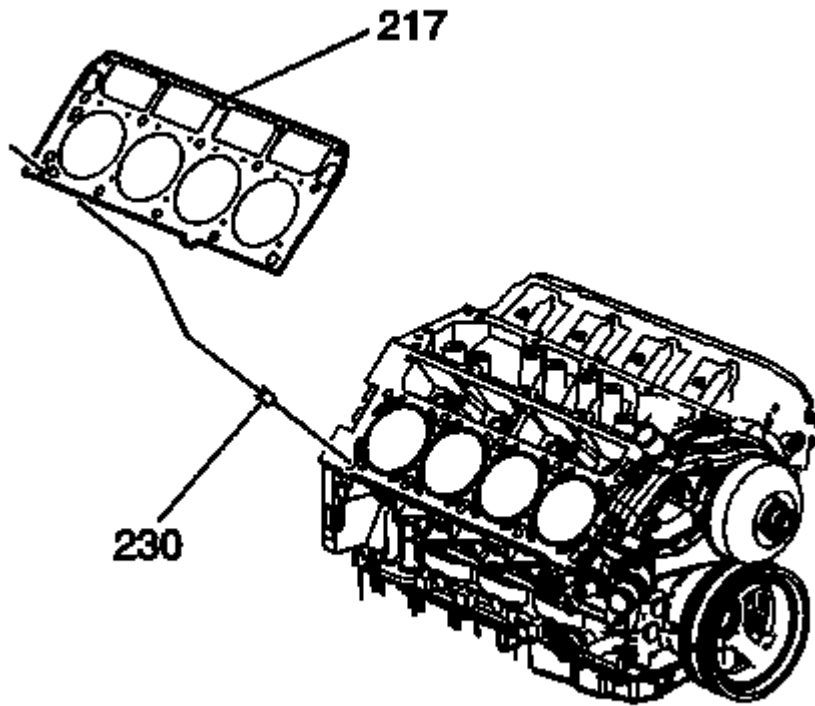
View Of Cylinder Head Gasket & Locating Pins
